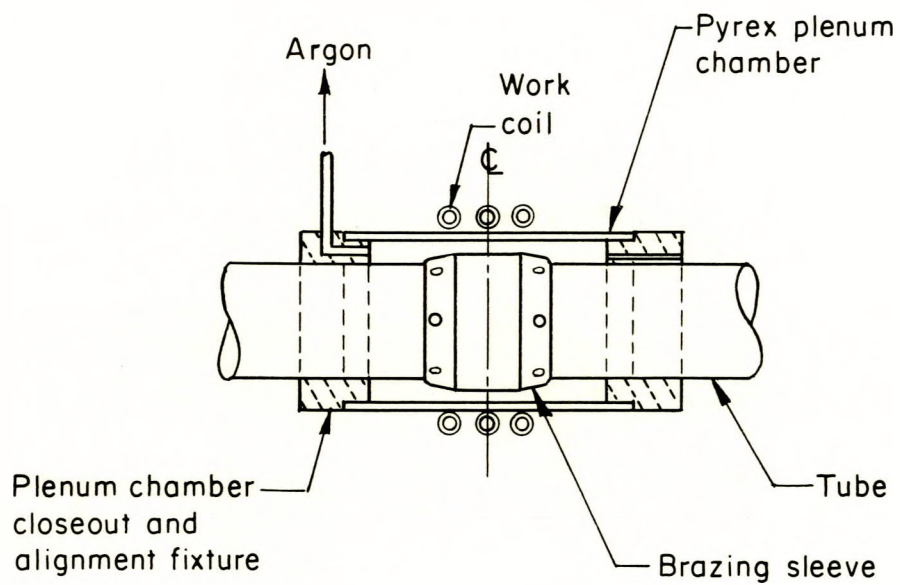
BRAZED JOINT FOR B-70 HYDRAULIC SYSTEM,
